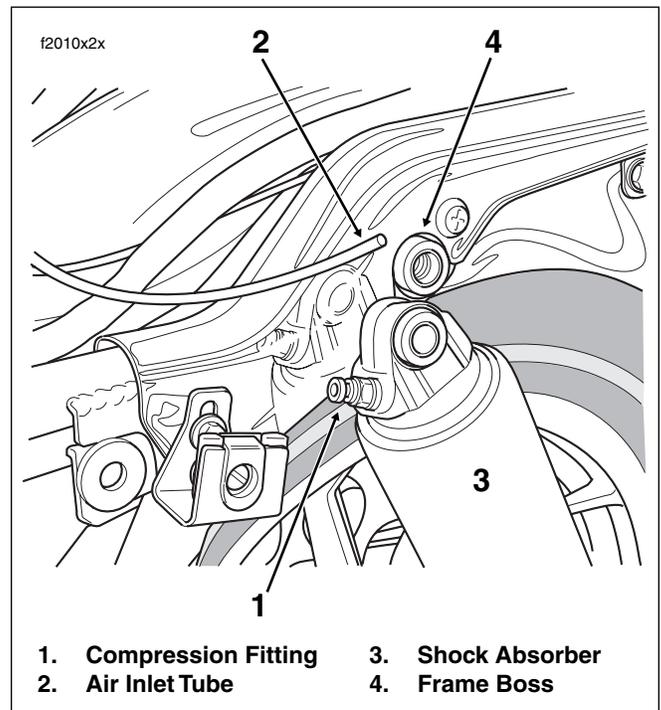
Depress Collar on Fitting and Pull Out Air Inlet Tube
